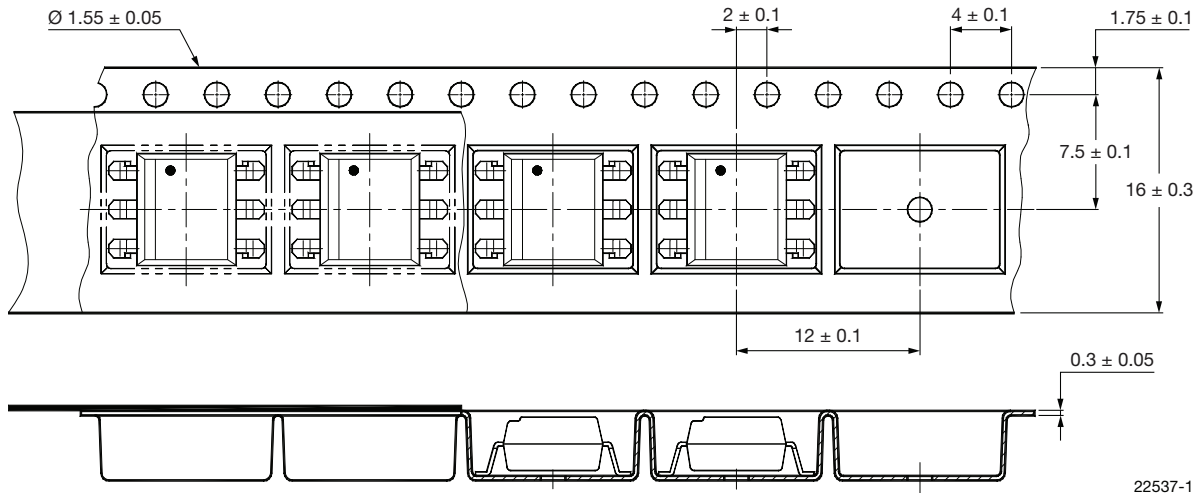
Tape and Reel Drawing, 1000 Units per Reel
